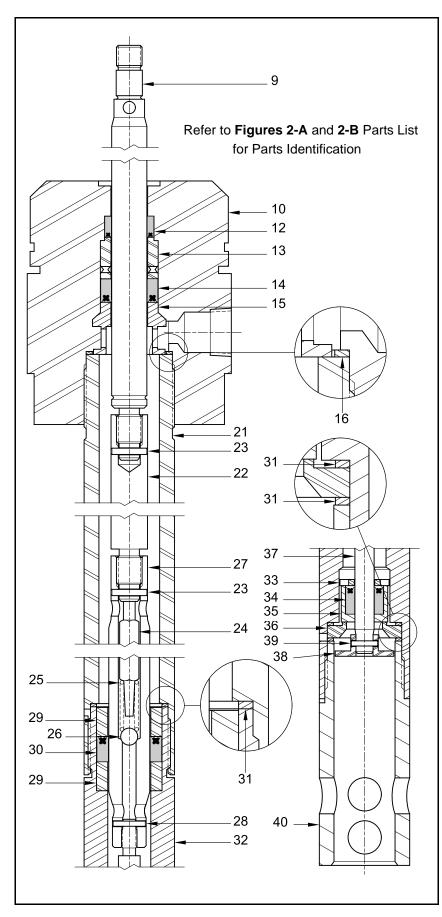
Pump Tube Assembly 338086-A1 and -C1 - Section View
